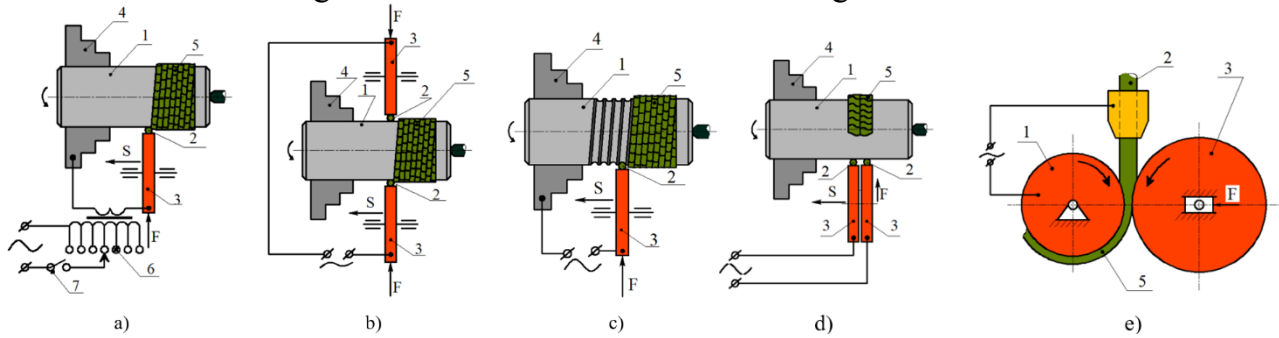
Diagram of contact roller-seam welding with metal powder use
